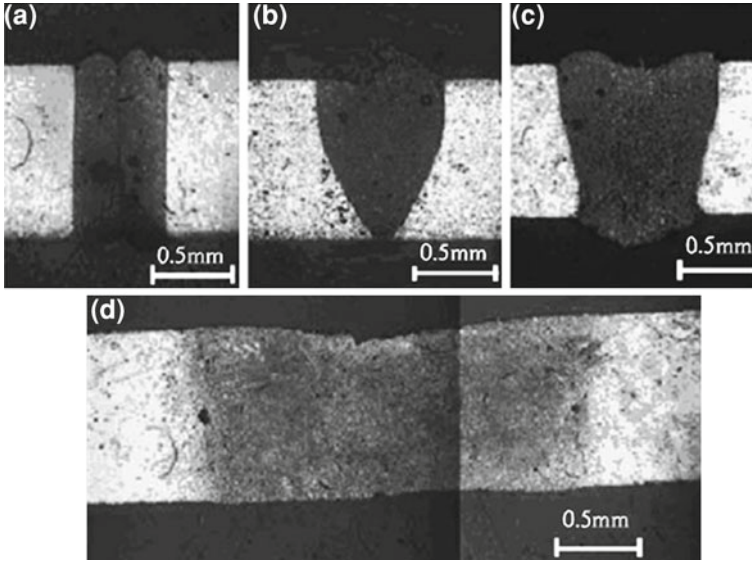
Cross section of AZ31. a–c Keyhole welds made with CO₂ laser with focused and defocused beams, and d conduction welds using diode laser [32]
